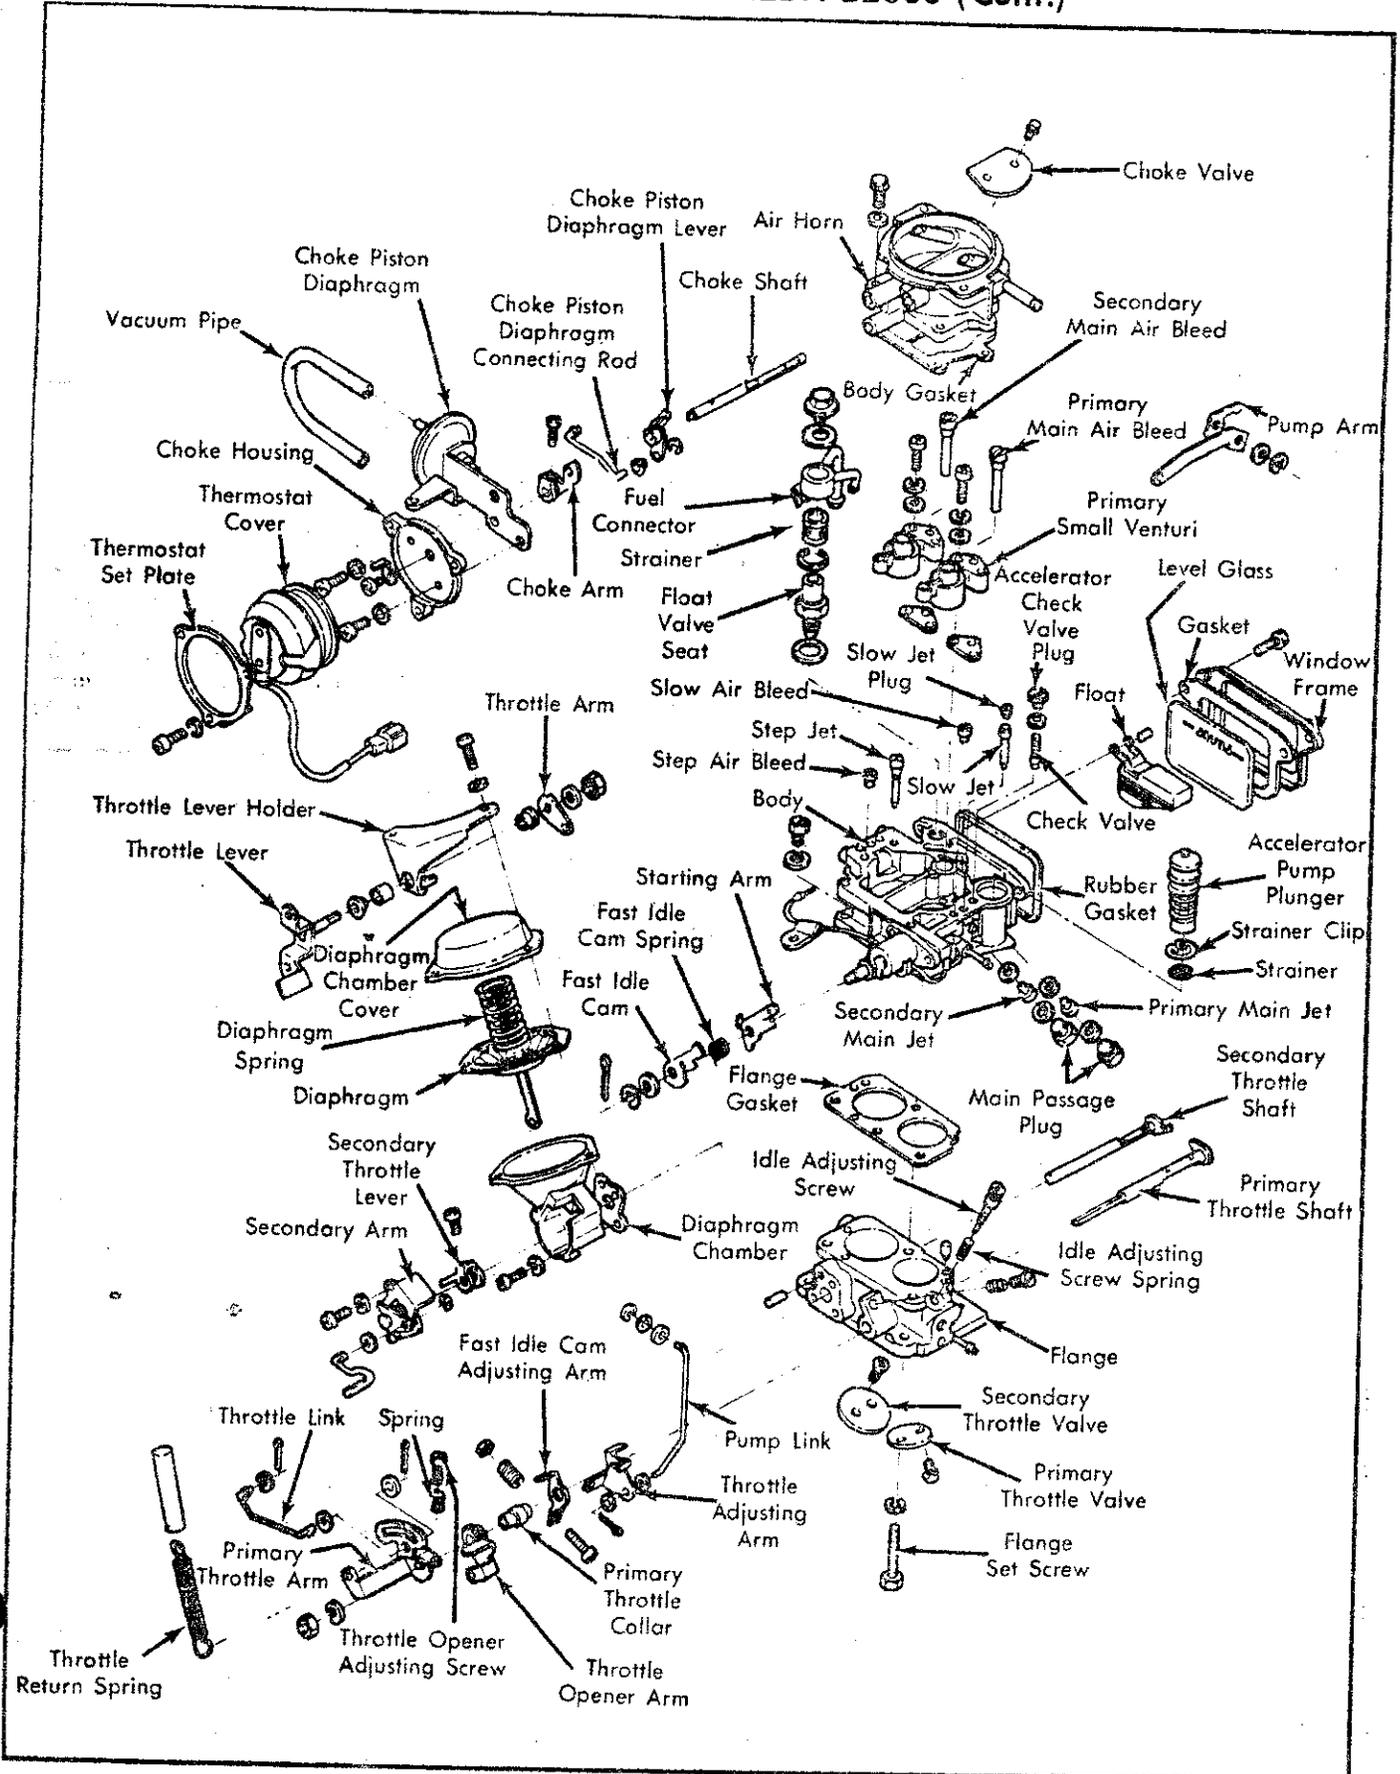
Exploded View of Nikki 2-Bbl. Carburetor
